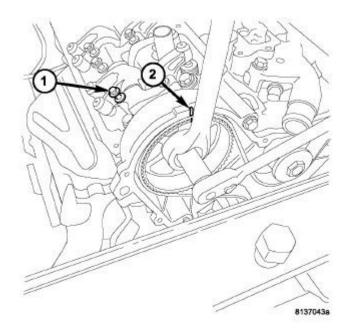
Right Cam Gear Retainer Bolt & Timing Mark Courtesy of CHRYSLER LLC
